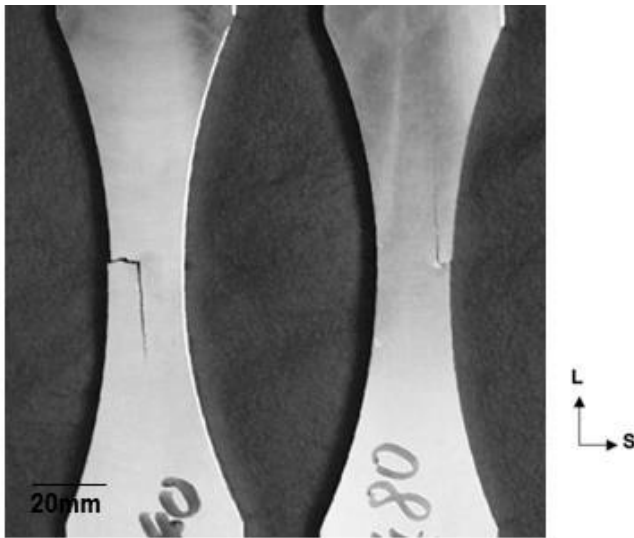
Macroscopic crack deflections in thick AA2297 plate for L-S orientation smooth specimen fatigue tests.
